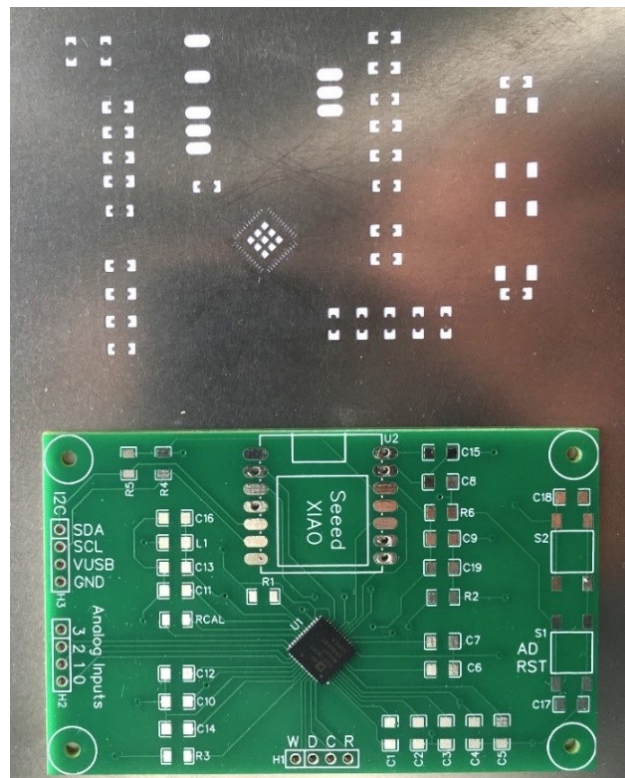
(top) PCB layout and stencil of the HunStat2 circuit. (bottom) The PCB board with SMD components embedded
